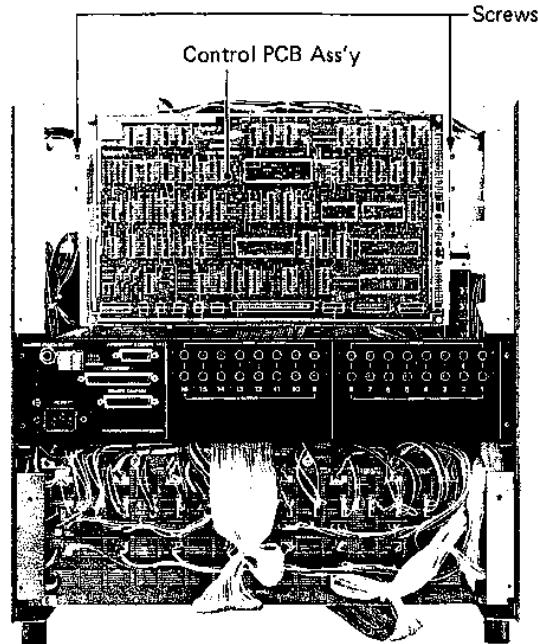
CONTROL PCB INSIDE THE TOP REAR PANEL
